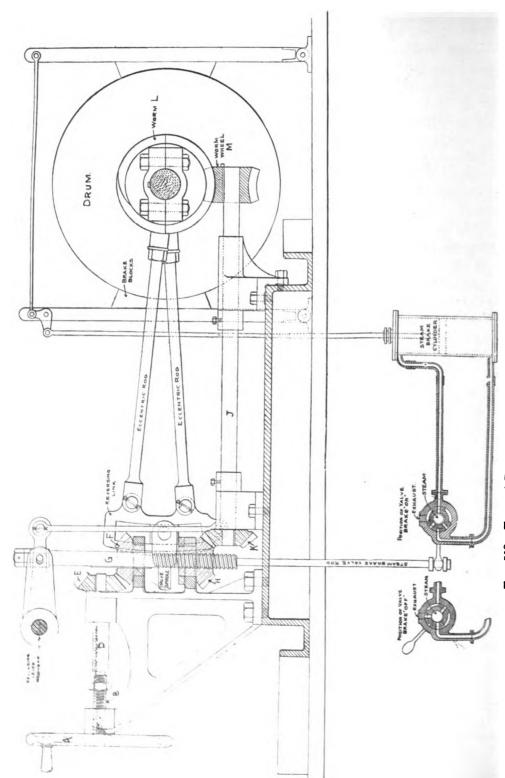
FUTEES' PATENT ABSOLUTE SAFETY WINDING GEAR.
